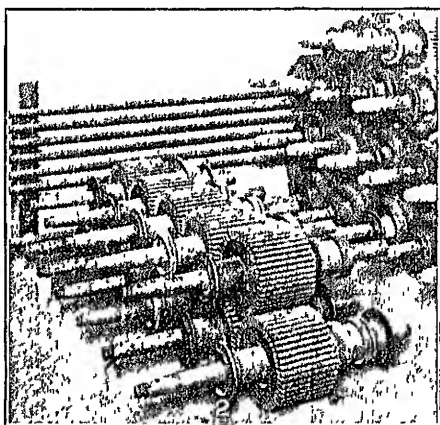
Worn Armature Shafts Before Welding.
